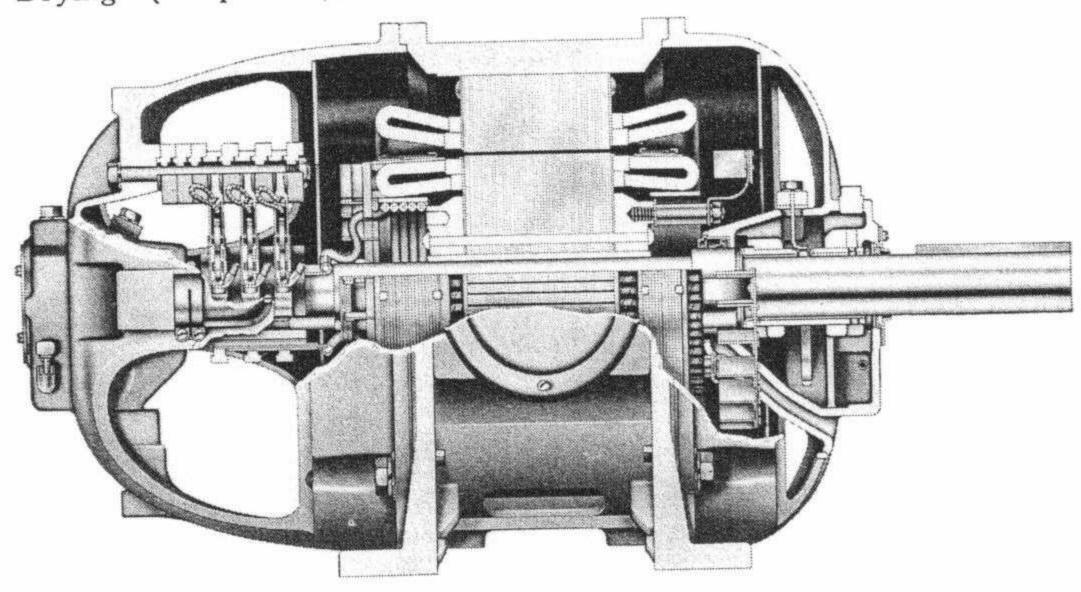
Cutaway View of Type CW (Wound Rotor) Motor
